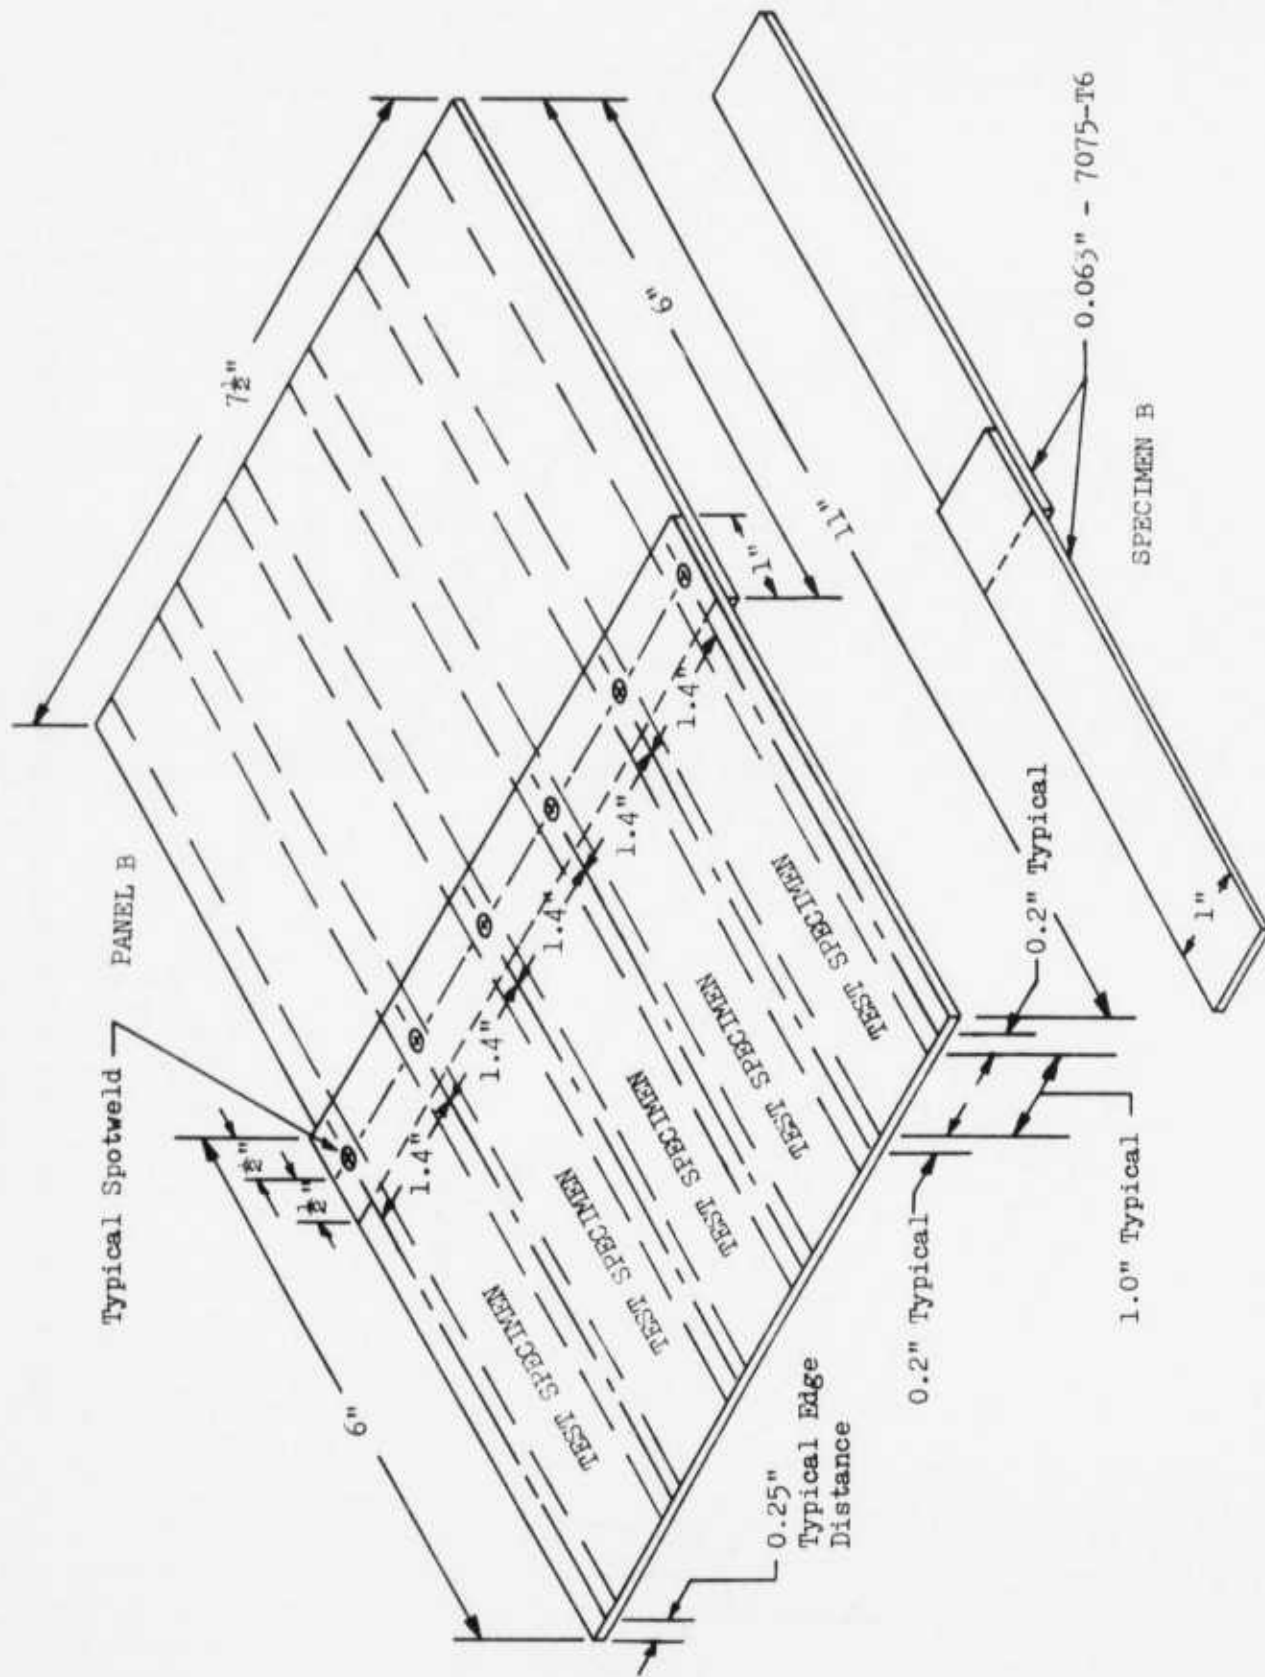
LAP SHEAR TEST PANEL AND TEST SPECIMEN FOR SPOTWELD -
